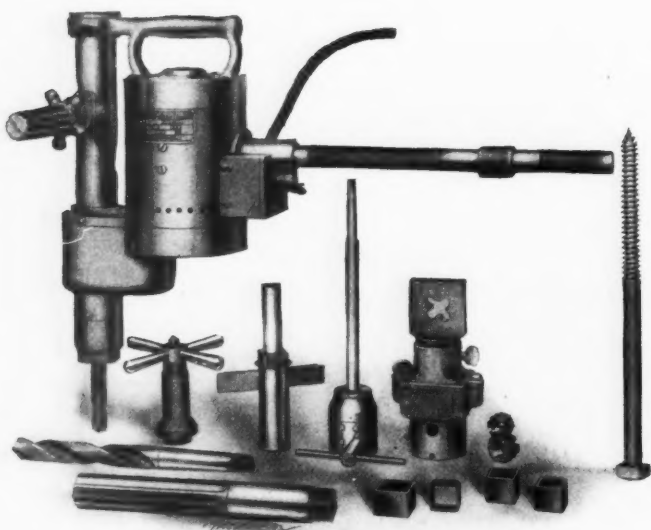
Combination Lag Screw Drilling and Driving Machine made by the Automatic Electrical Tool Co.
